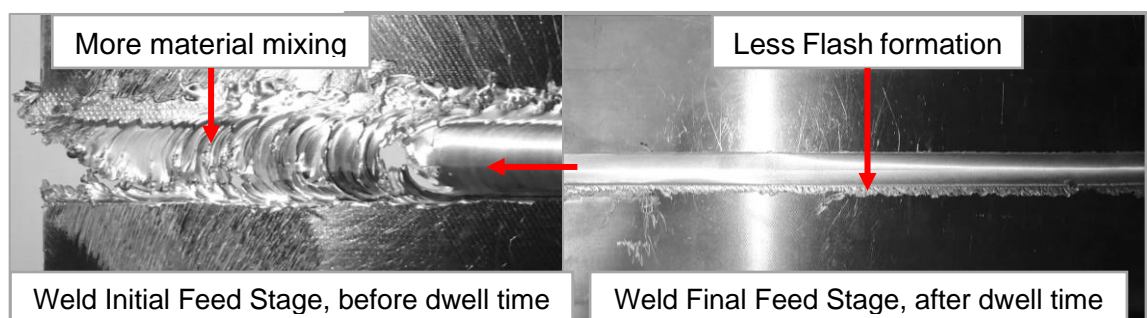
Bobbin FSW Feeder successful weld trial
